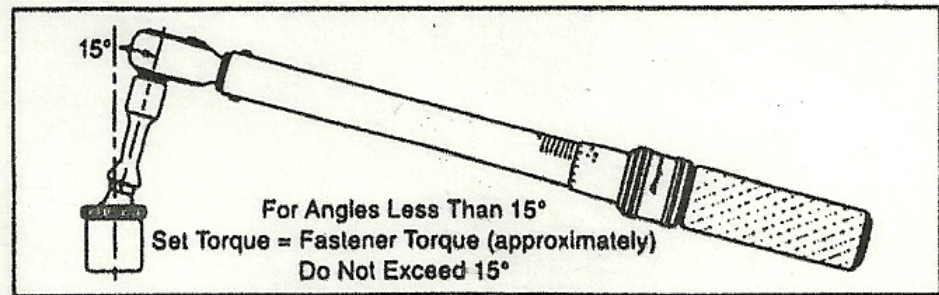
Fastener torque is greater than torque wrench square drive torque.
